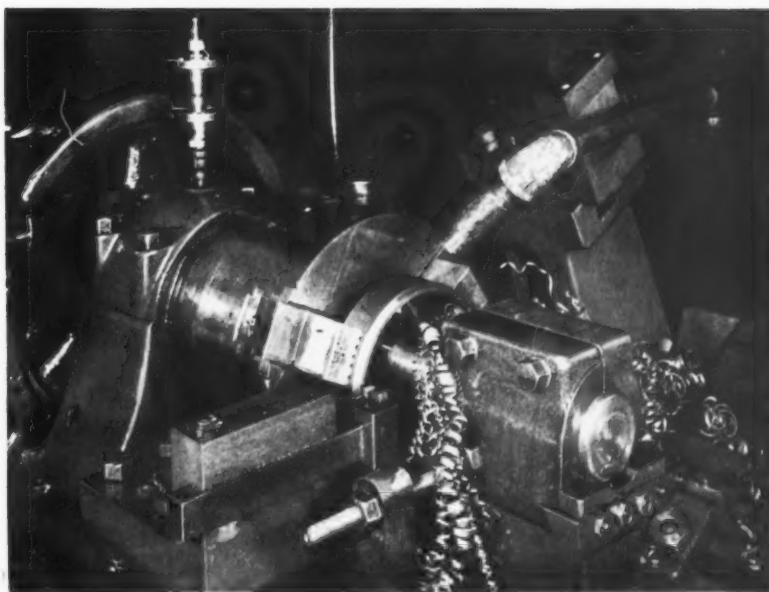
Converted Single-spindle Automatic Engaged in Turning Roller Bearing Races
